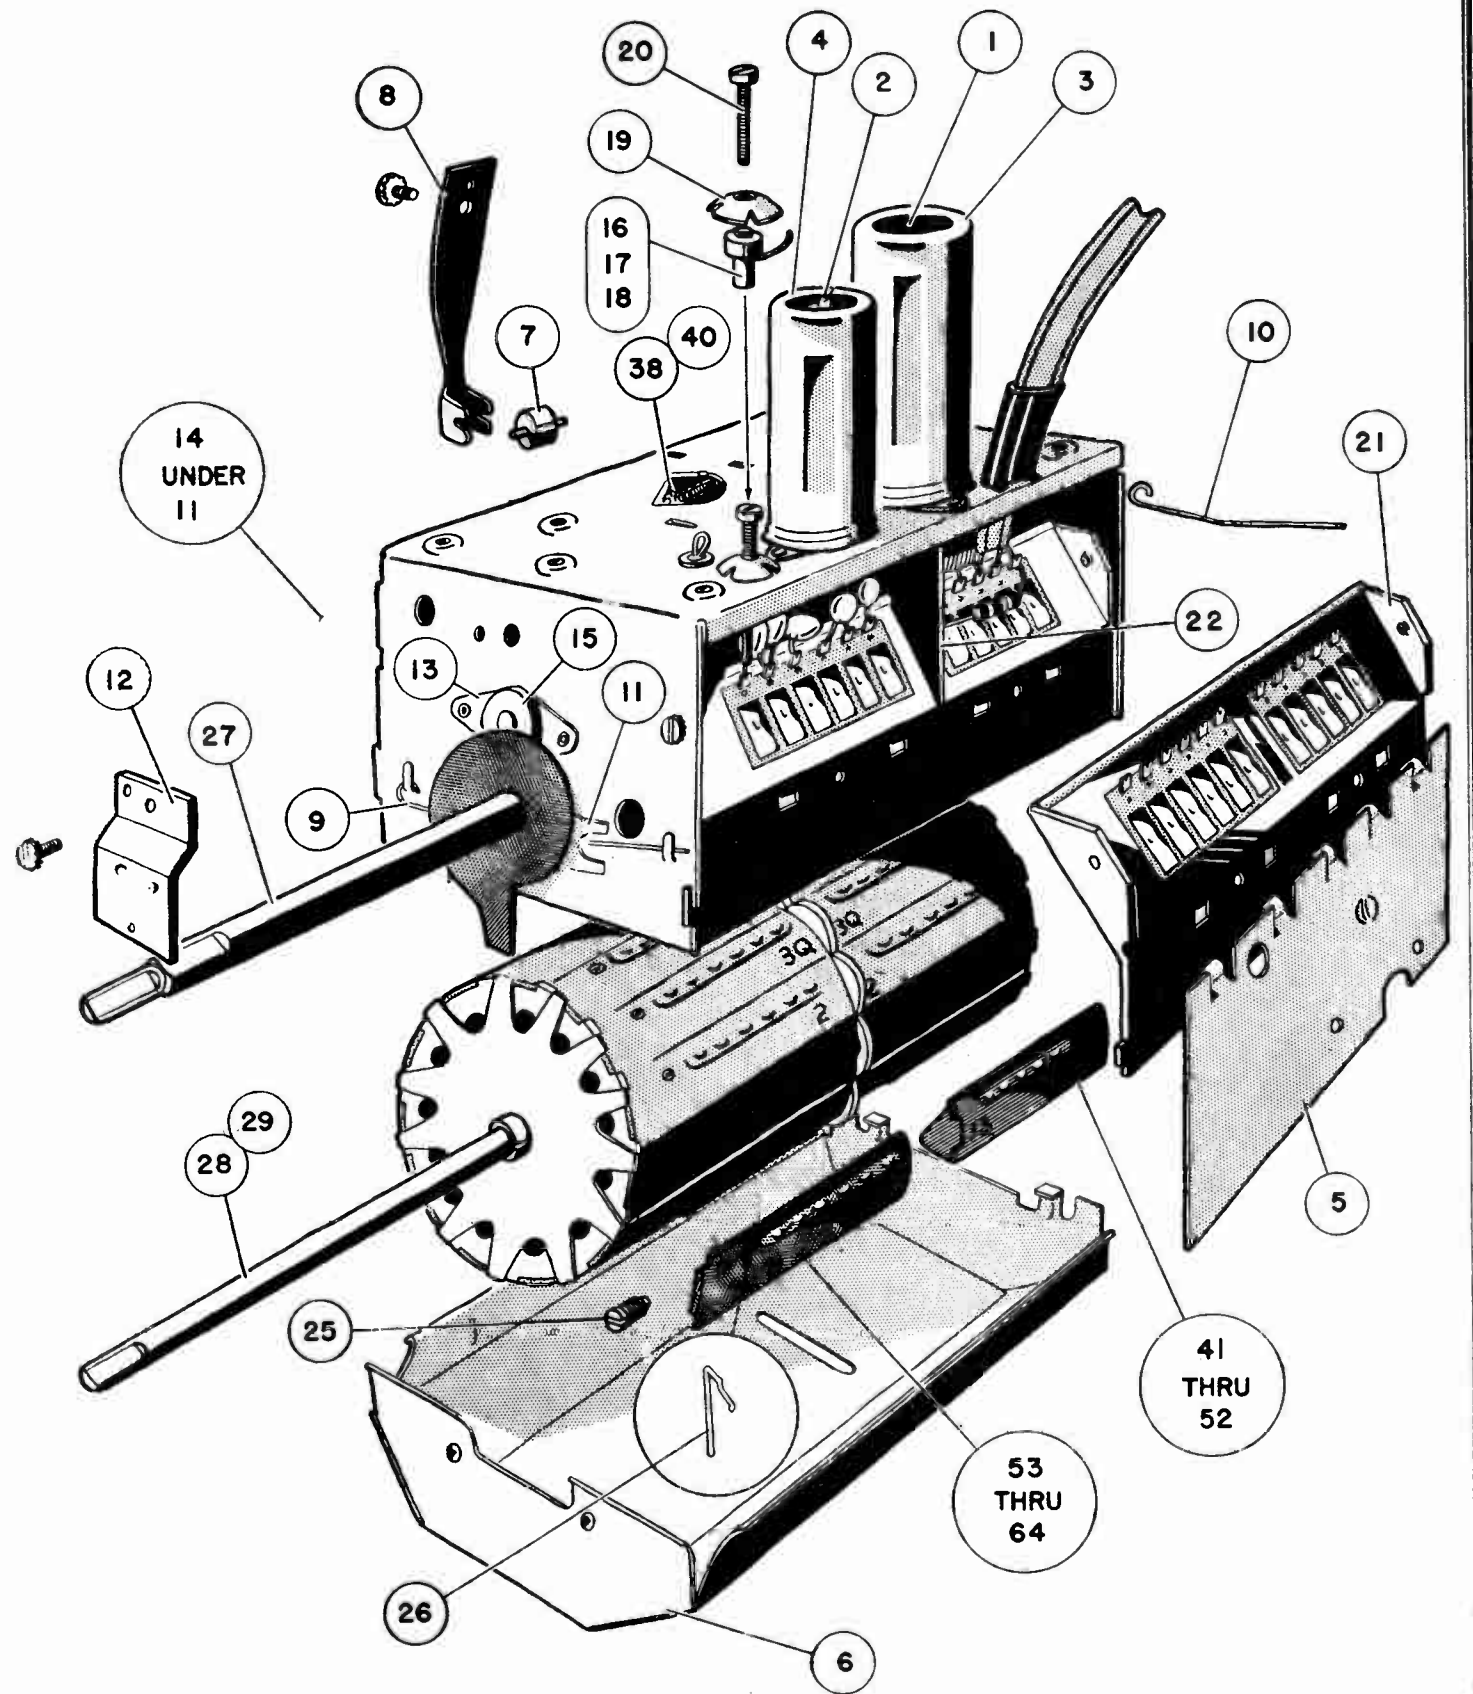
Exploded View Showing Location of Parts on T95-28, T95-29 and T95-30 R.F. Cascade Tuners.
